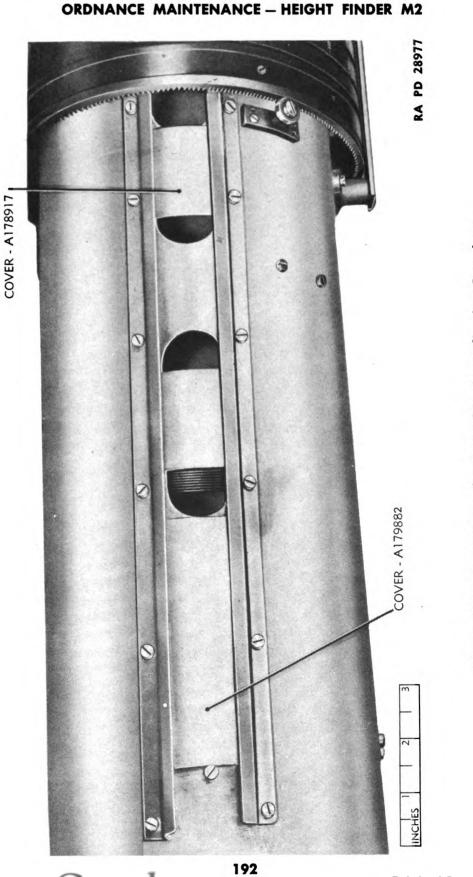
Inner Tube Showing Objective Adjusting Openings
